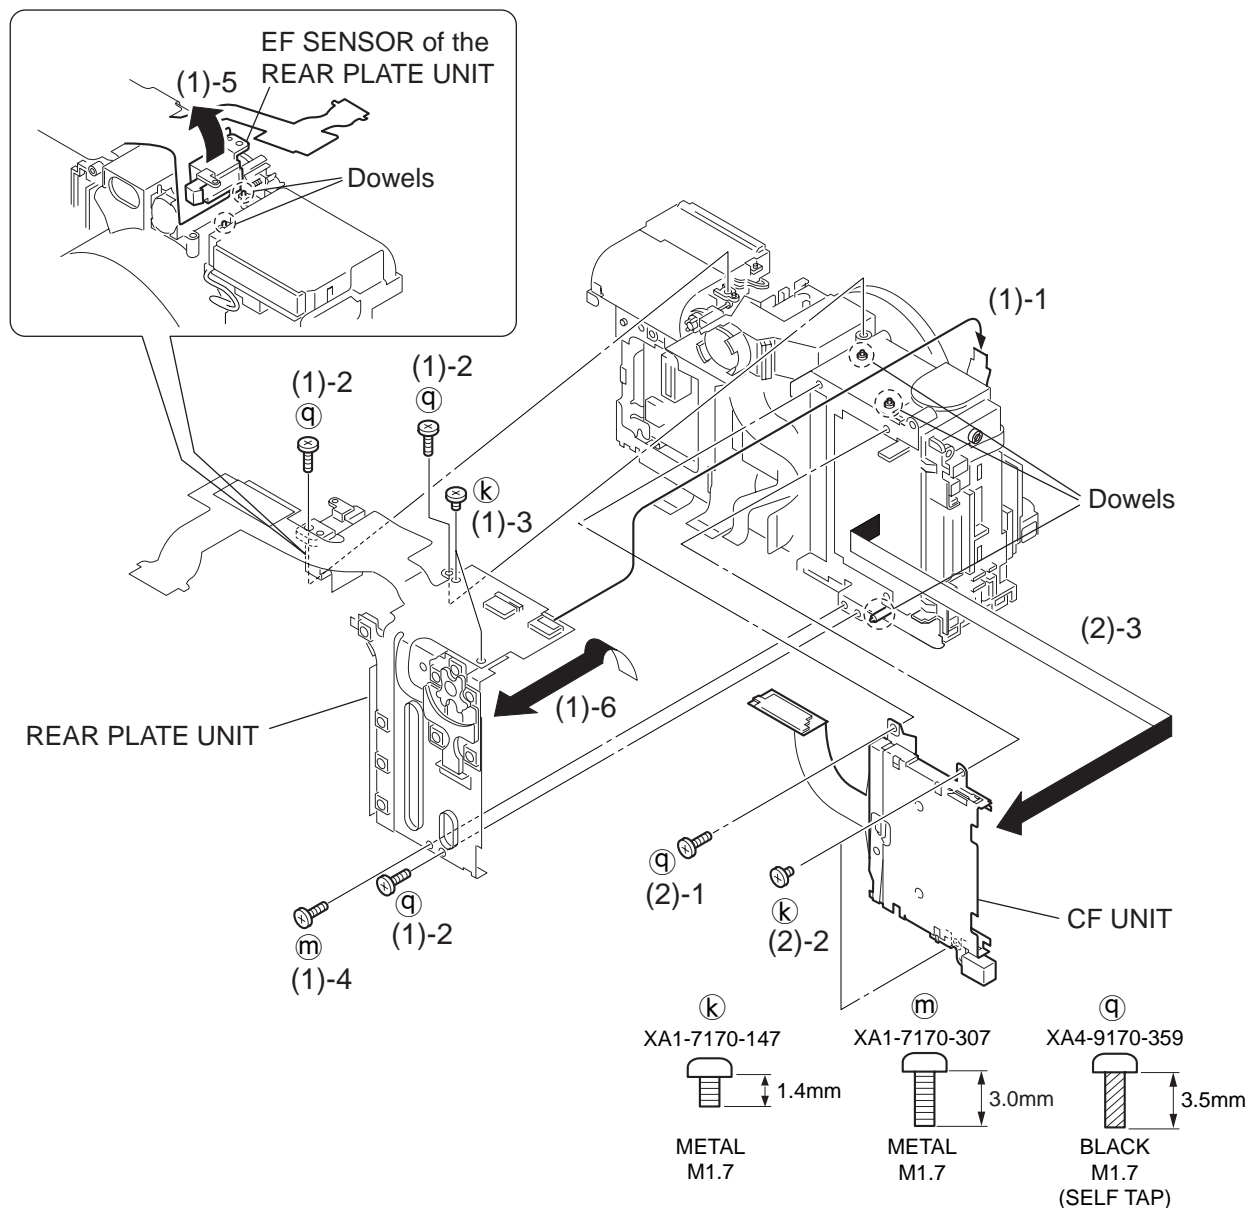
REAR PLATE UNIT, CF UNIT
